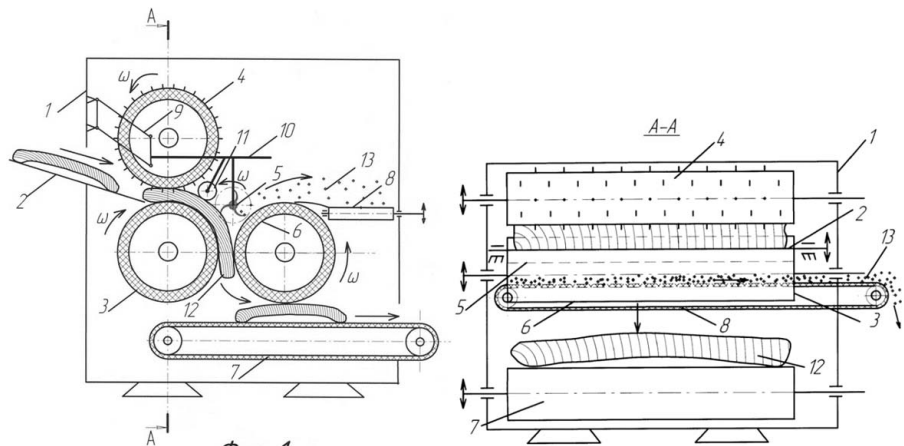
A machine for cleaning the surface of melon fruits from the peel: 1 – bed; 2 – feeding tray; 3 – support roll; 4 – needle roll; 5 – milling drum; 6 – clamping roll; 7 – pulp conveyor; 8 – peel conveyor; 9 – parallelogram mechanism; 10 – holder; 11 – wheel; 12 – separated pulp; 13 – cut crust [6]
